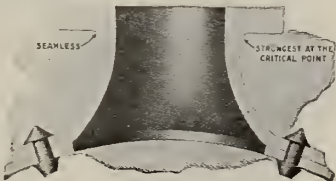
SEAMLESS STEEL BOILER NOZZLE
